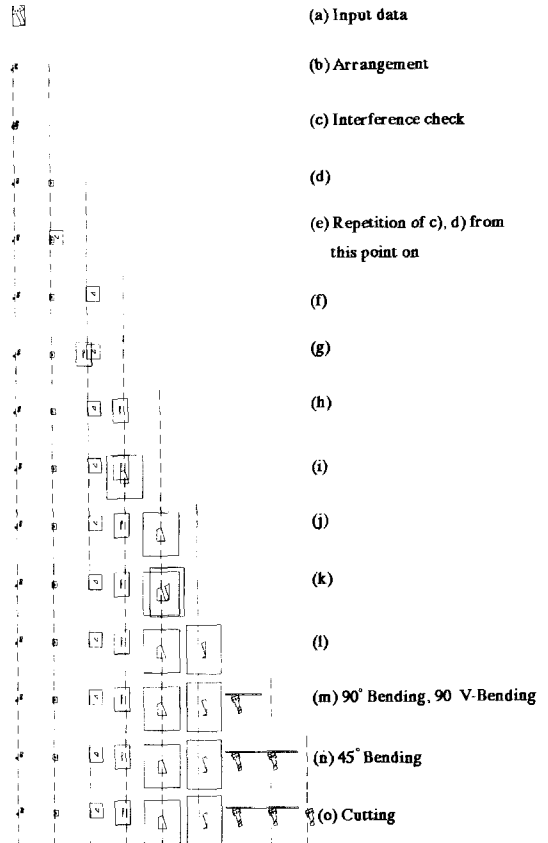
Automatic strip-layout for a sample blank with bending and piercing operation
